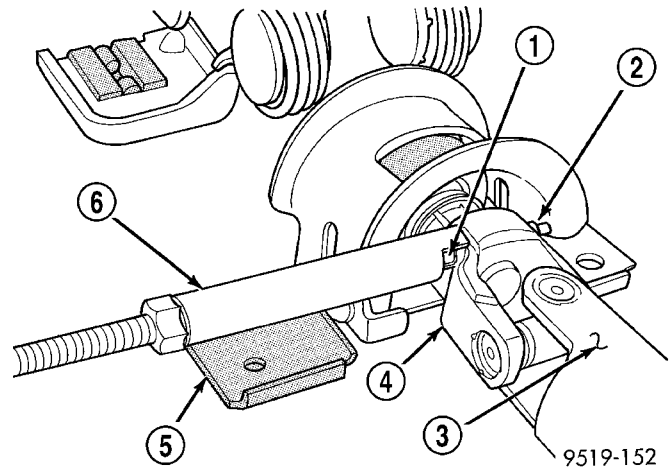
Removing Roll Pin From Flex Joint (Typical)
